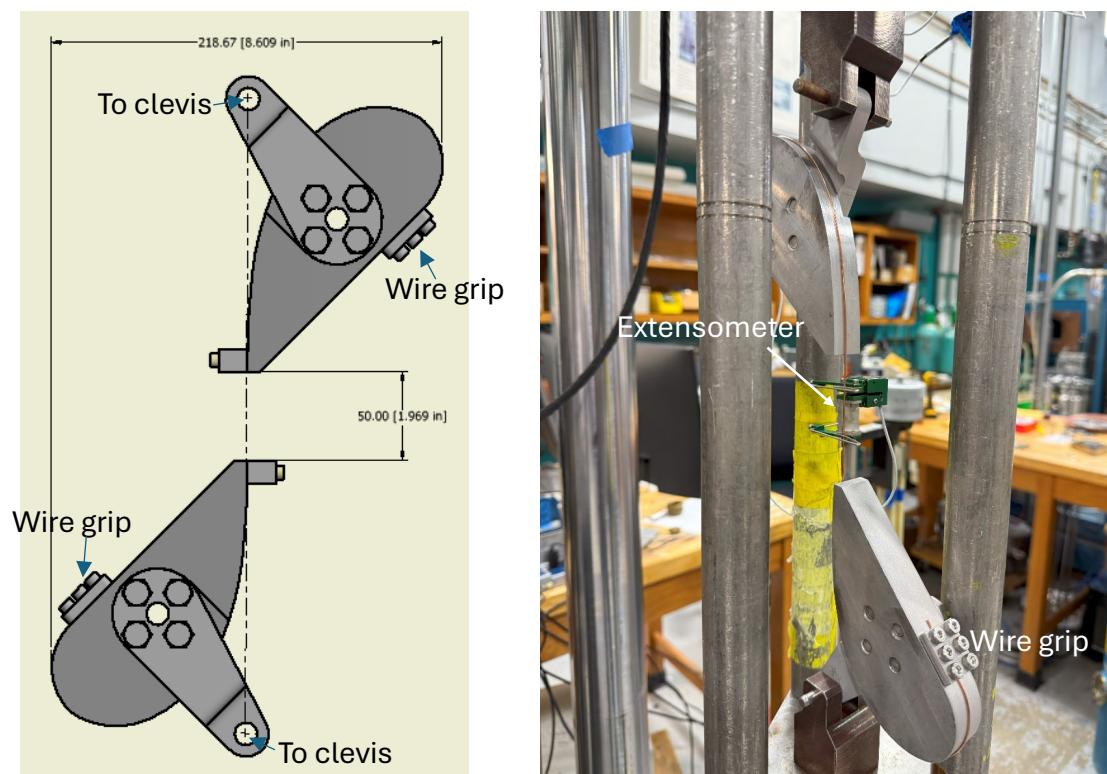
Mechanical testing of NbTi wire. (a) wire grip design. (b) a sample mounted on the grips with an extensometer on the MTS machine.
